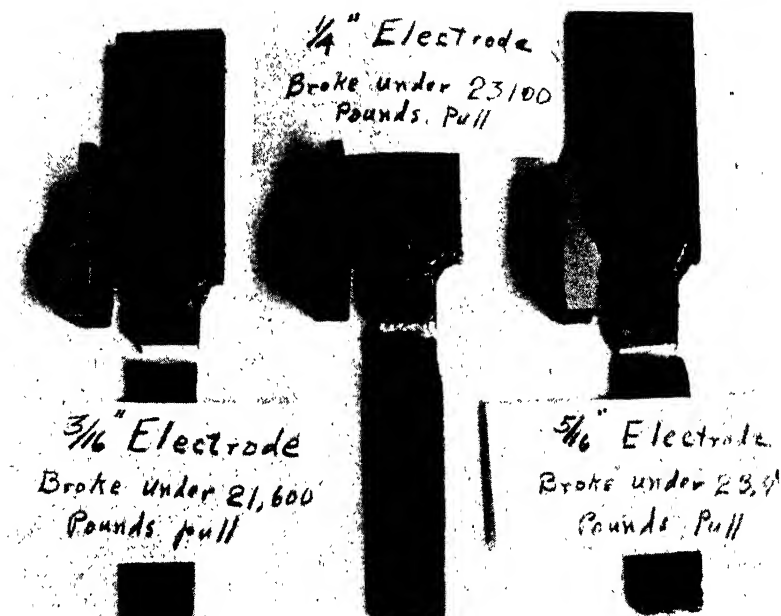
The use of large electrodes and greater welding currents (within reasonable limits) does not involve a sacrifice in welding quality and often improves the welded joint. In these three welds, made with three different sizes of electrodes at the appropriate current for each, the one made with the largest electrode was the strongest and looked the best when etched with acid in cross section. (Courtesy of R. G. LeTourneau, Inc.)
